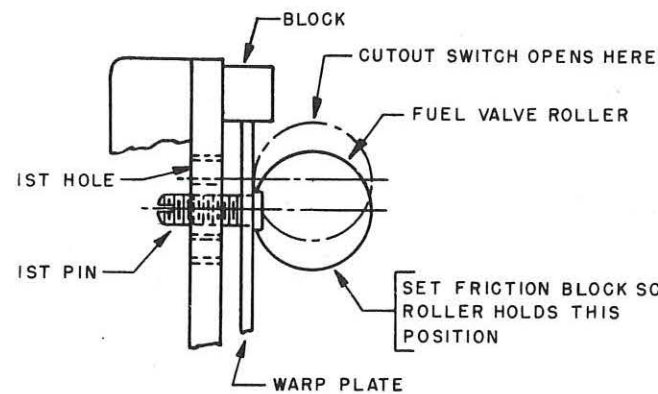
Servo Cam Plate and Fuel Valve Roller.
